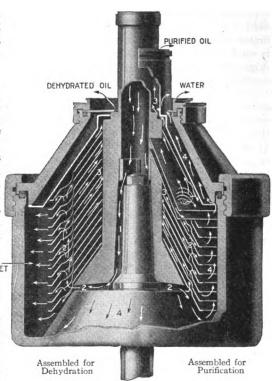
Cross-Section of the Dual-Purpose Oil Purifier Bowl
